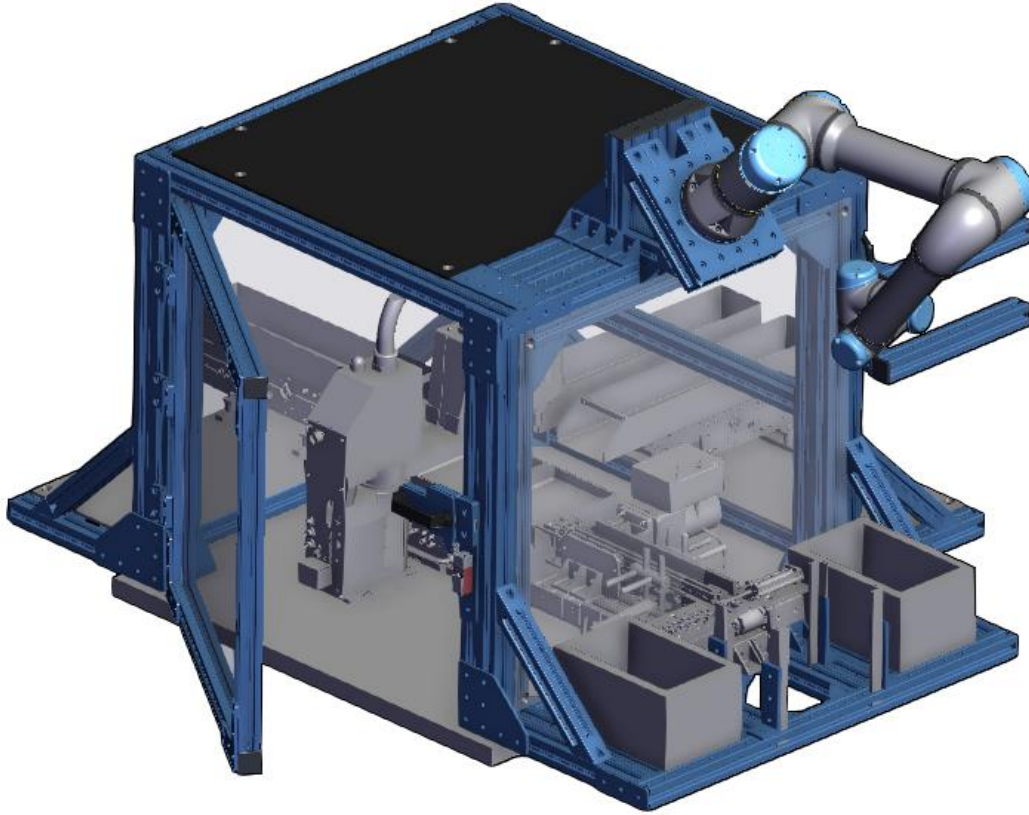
Automated Assembly Cell Safety Lock Door Designs
